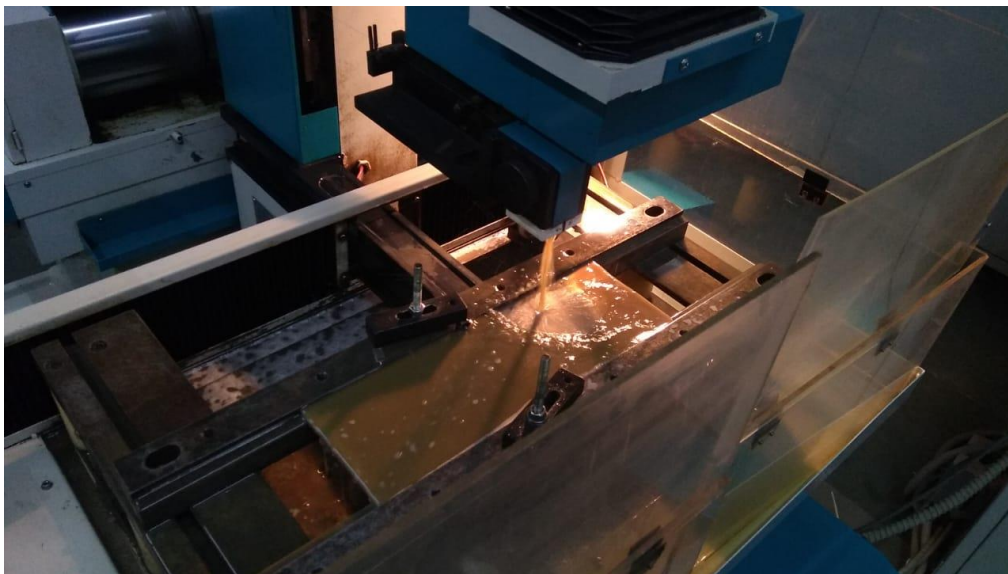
EZEECUT NXG CNC wire cut EDM machine cutting an Al6061-T6 sheet with 5mm thickness.
